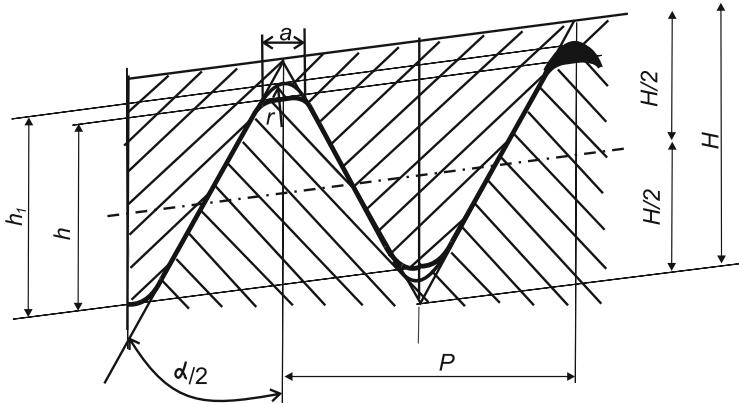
Scheme of the tool joint tapered thread according to standard API.
